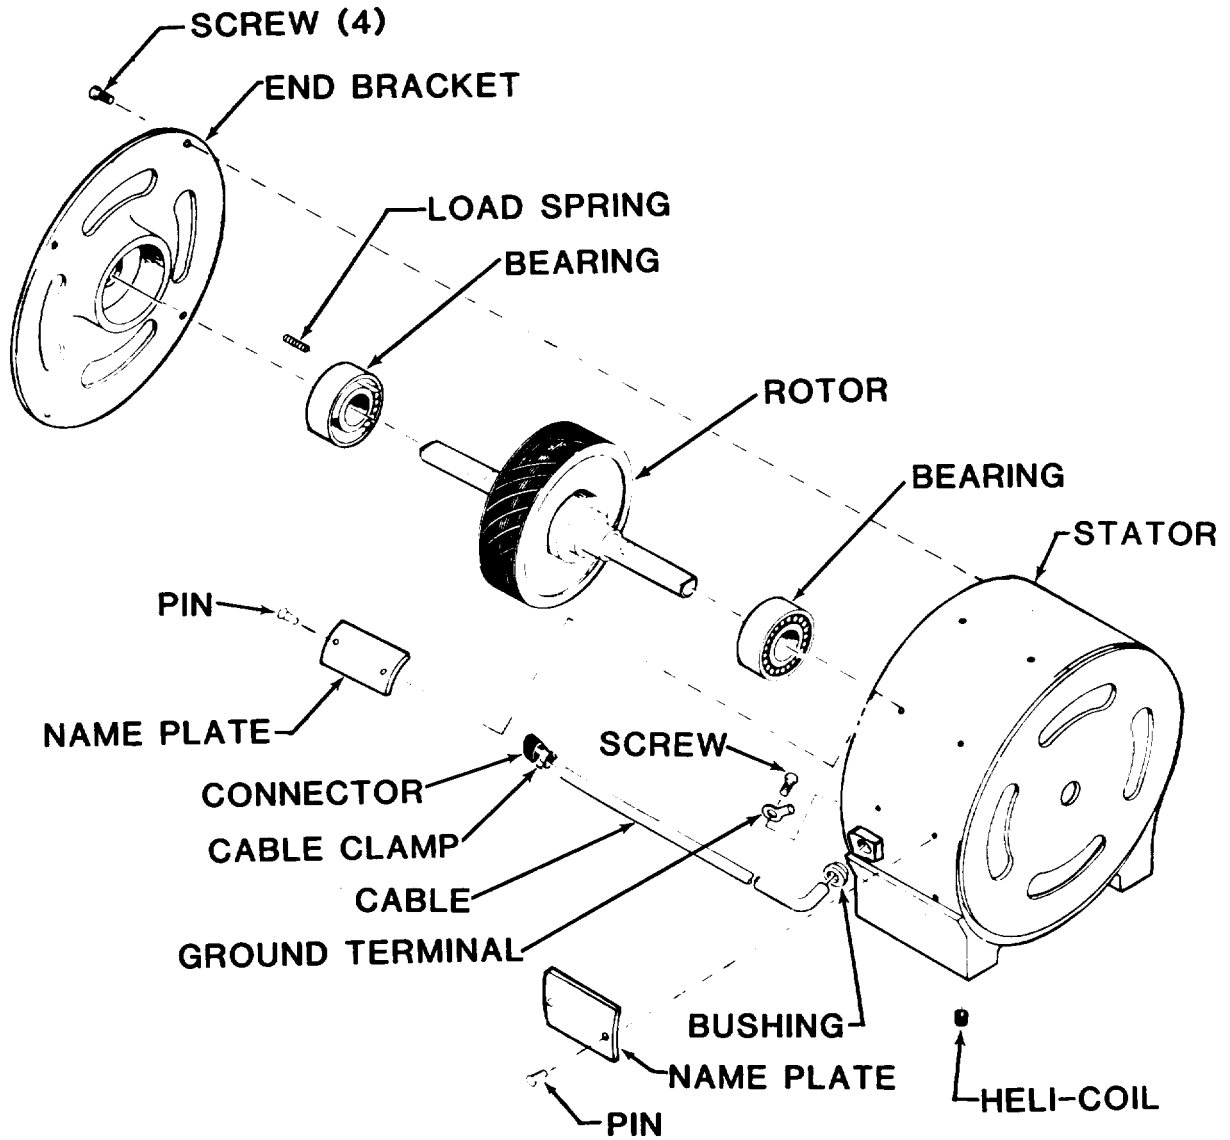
Motor Assembly, Custom Motor Design, Model 184-01-0412
